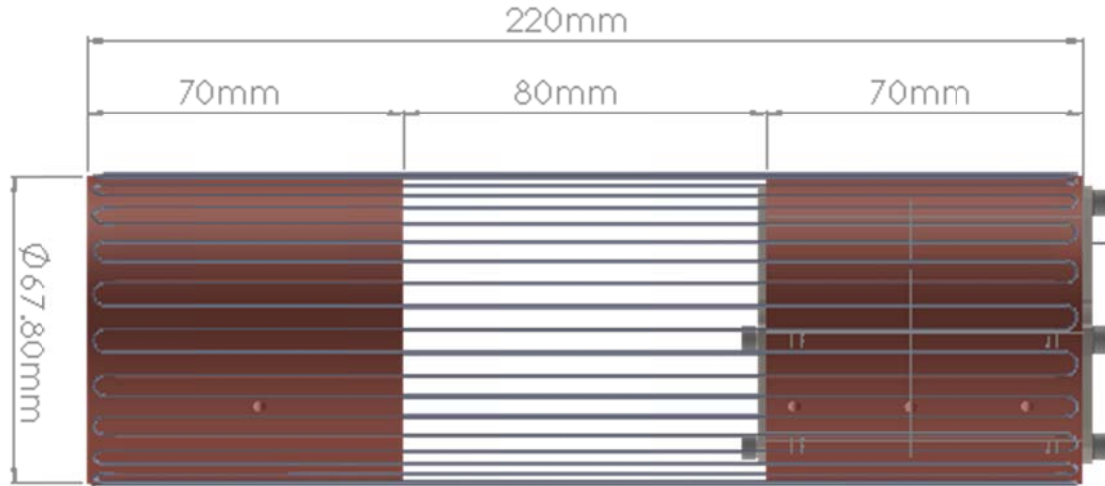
Orthographic view of SolidWorks model of PHP showing dimensions.
